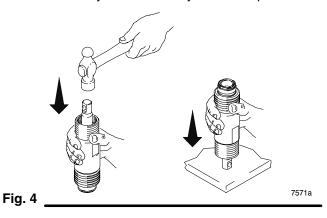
Remove piston rod from sleeve, or remove sleeve from cylinder.
